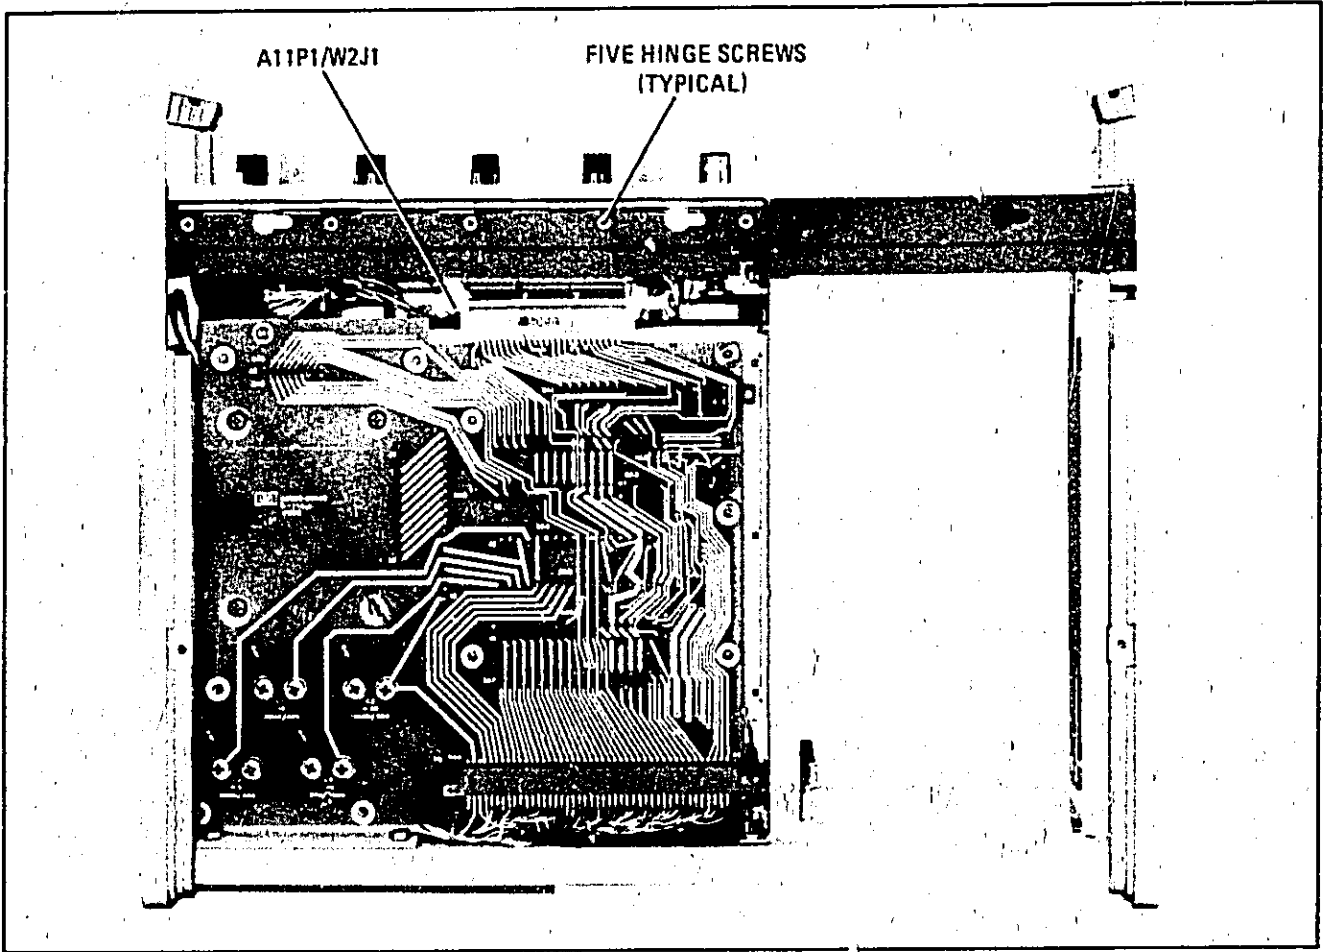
Removing Hinged Front Panel Assembly From Mainframe
